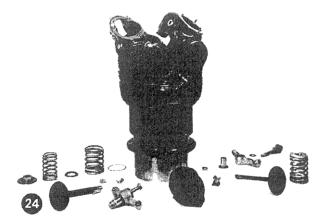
Cylinder, valve gear parts and exhaust connection.
